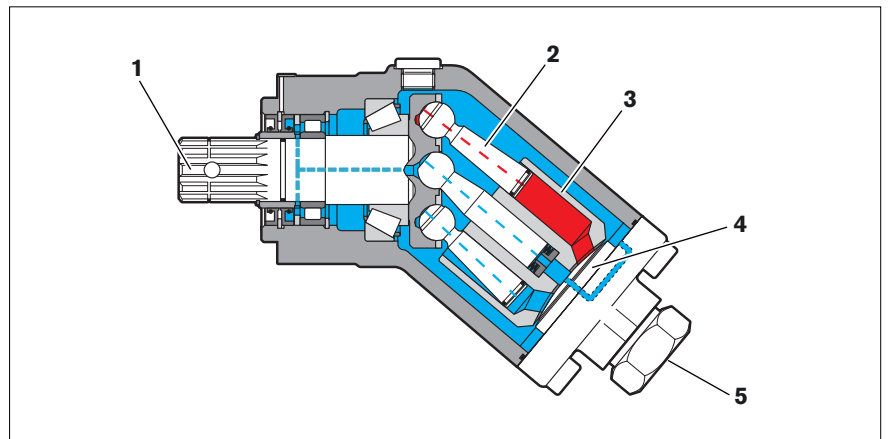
Assembly of the A17FO/A17FNO Series 10
